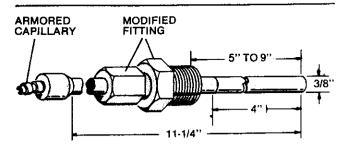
shows the 3/8" O.D. Rigid Bulb dimensions and the modified fitting used.
